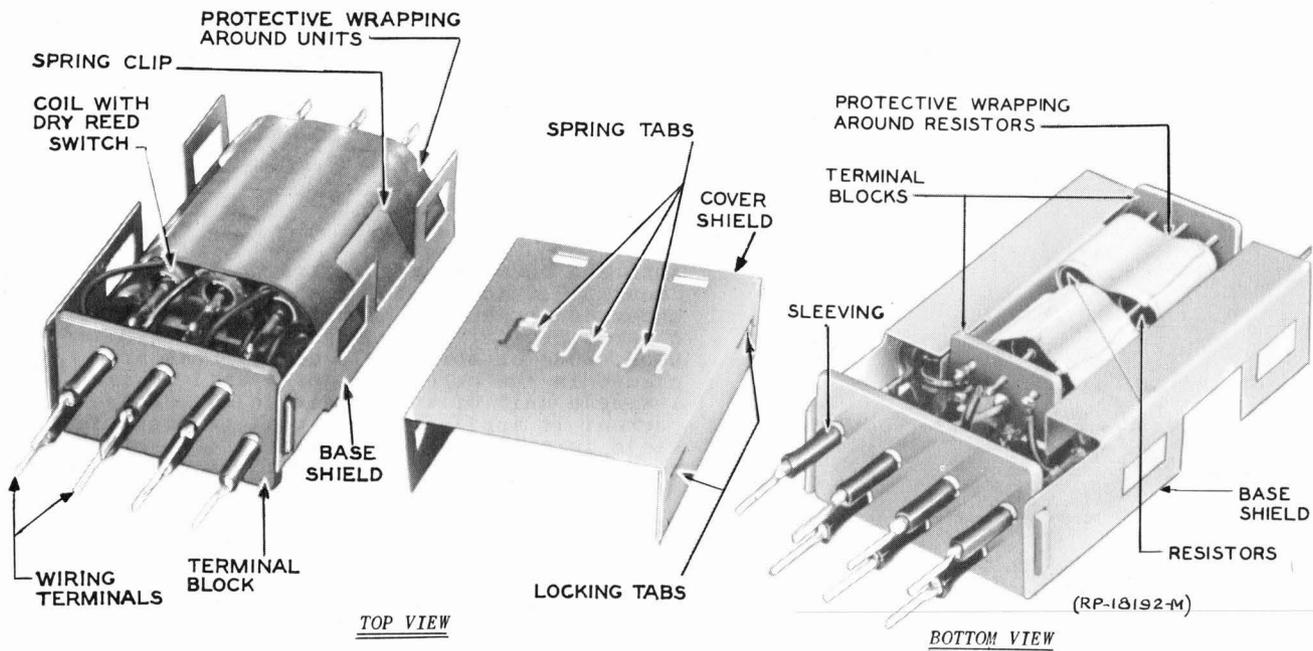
289 TYPE RELAY WITH COVER AND COVER SHIELD REMOVED
